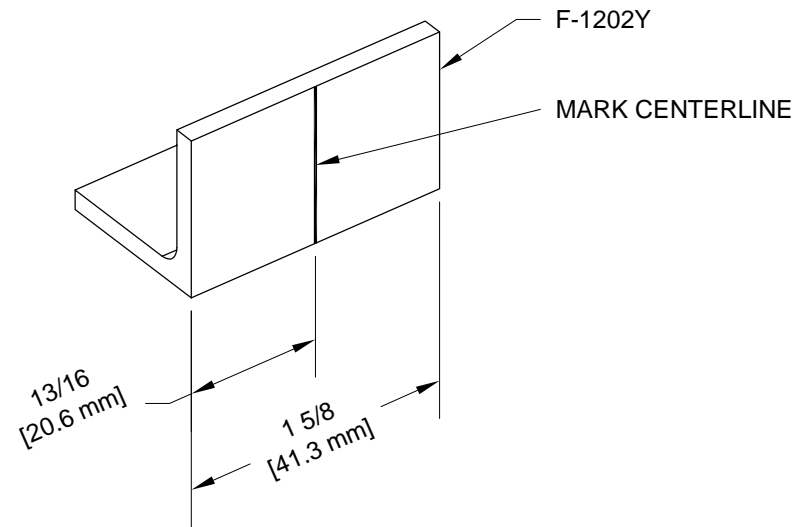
MAKING THE STRUT ATTACH ANGLE
